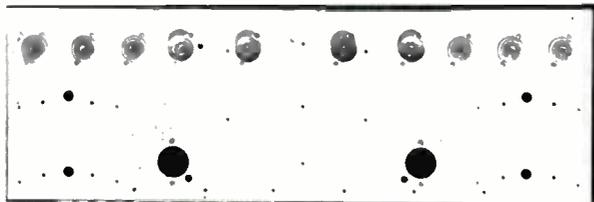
(left). Top view of the chassis with tube sockets mounted.
